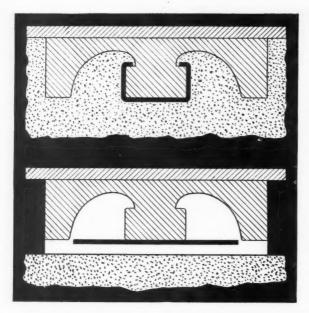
Drawing illustrating design of tool for forming double flanges.
